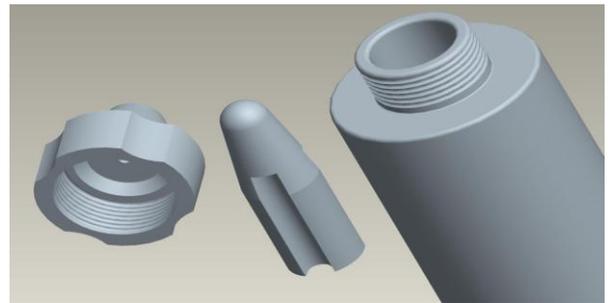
3-D Drawing Of Injection Chamber Assembly
